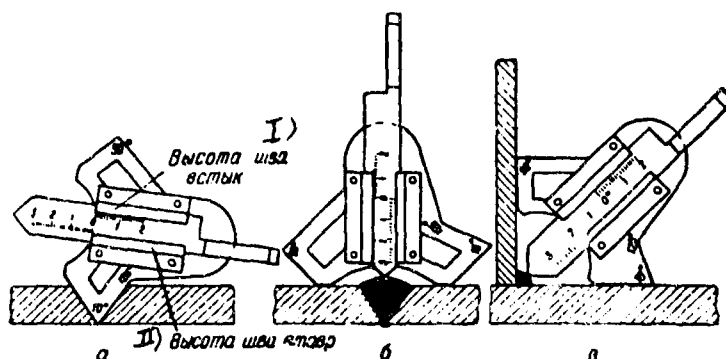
General Purpose Angle Template for Inspecting the Welded Joints: A - checking the preparation of the edges in case of butt-welding; B - measuring the height of a butt-welded seam; and C - measuring the height of a fillet weld in a T-joint. Key: I) Height of Butt-Welded Joint: II) Height of T-joint.
